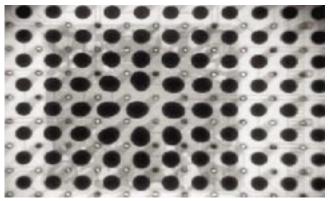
X-Ray Image of Popcorning Solder balls in the center of the package are oversized but had not bridged.
